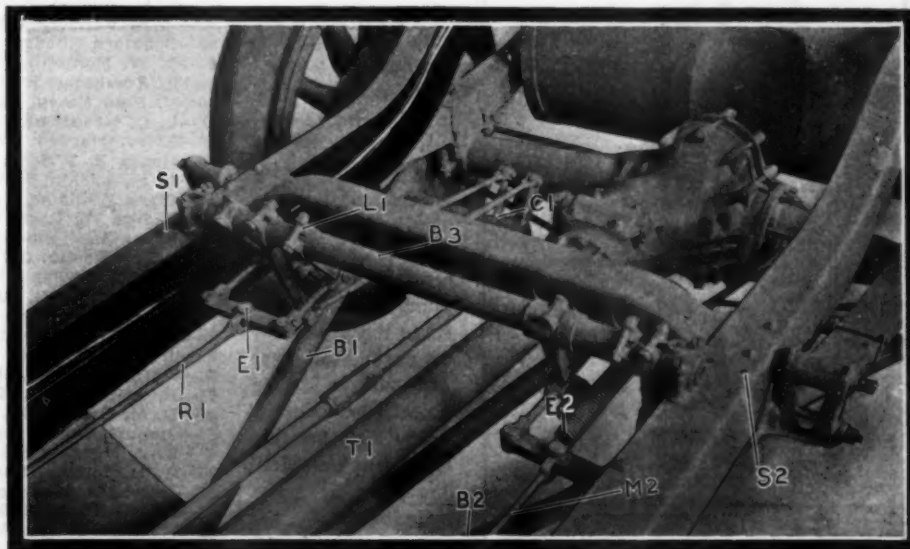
Looking at the rear of the Orson chassis and the details of design of the axle, torsion tube and brake mechanisms
